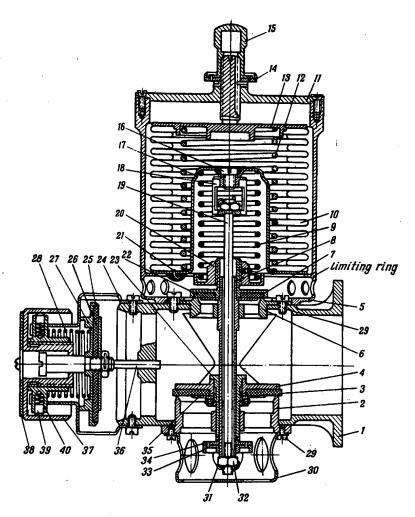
Pressure Regulators, Types РД-4 and РД-6
